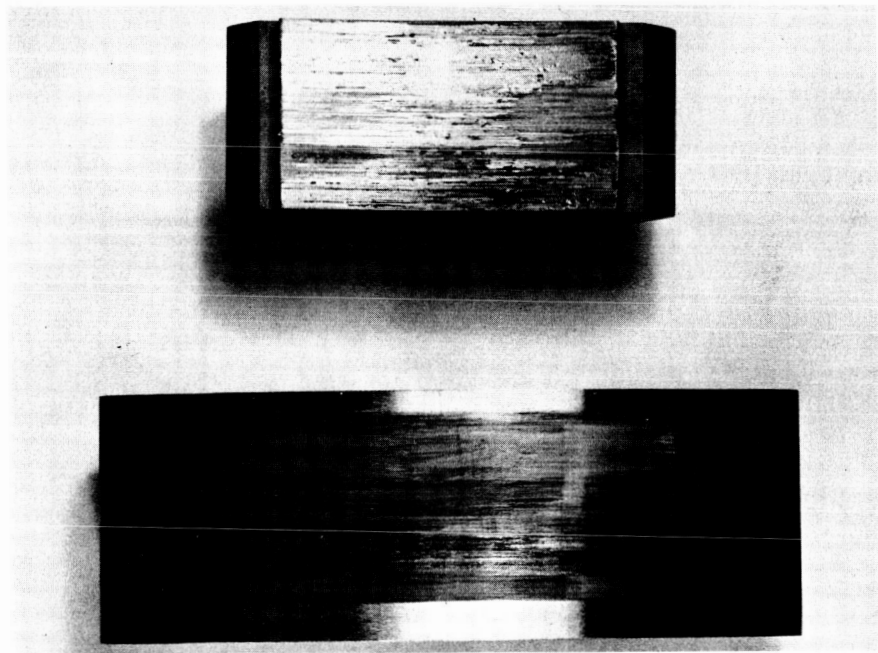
BALL JOINT TEST SPECIMEN TYPE - 14;
